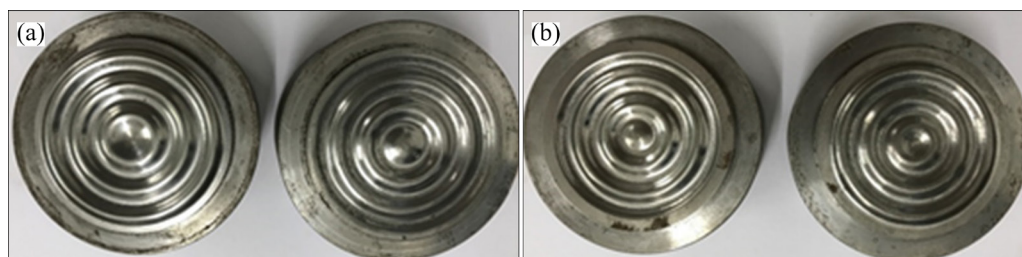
Two sets of ring-groove mold: (a) Ring-groove mold I; (b) Ring-groove mold II
